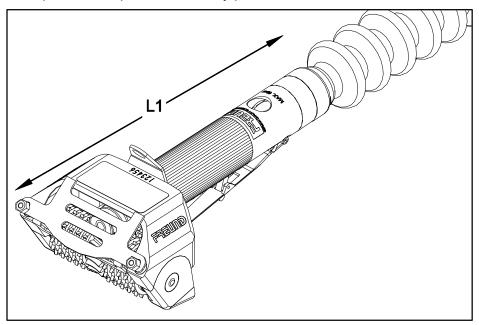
Mounted Hand-Skinner HSK8-P3
